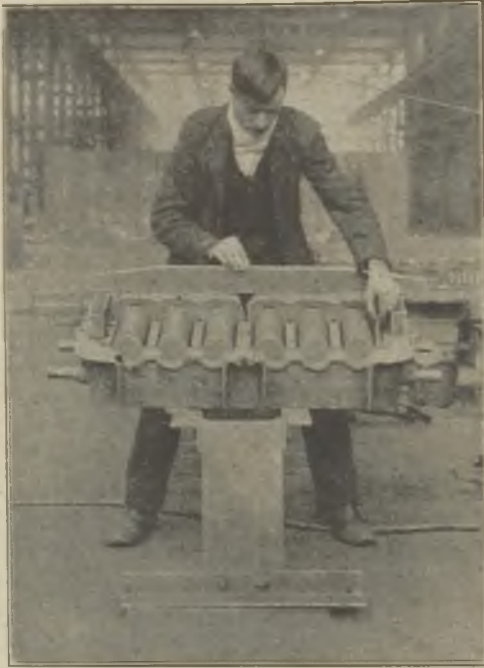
SHOWS THE GAUGING OF THE BARREL CORE.
